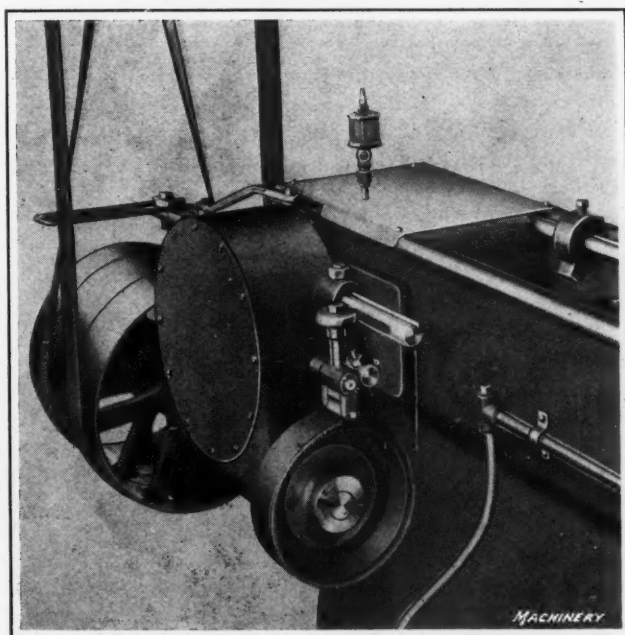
View showing Tight and Loose Pulleys, Worm-wheel Housing, and Band Brake
